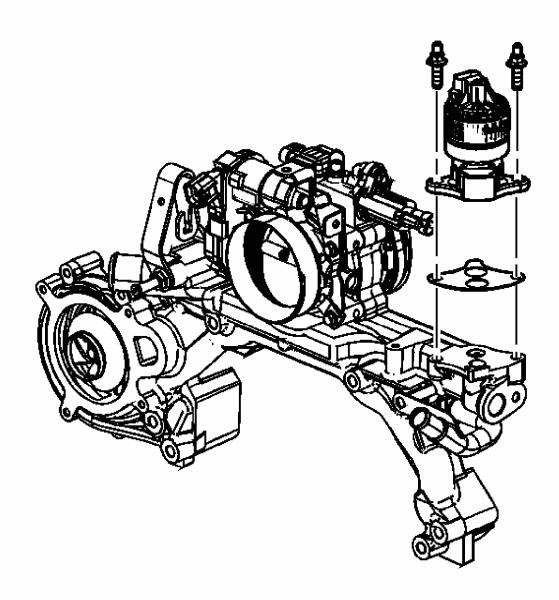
View Of EGR Valve Bolts Courtesy of GENERAL MOTORS CORP.
